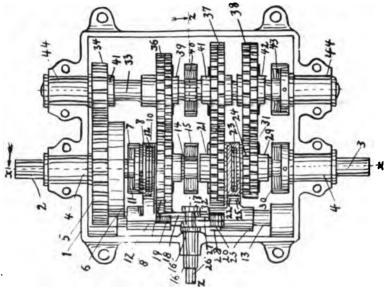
Harrison change gear, plan with cover removed, staggered gears. 3, Line shaft. 2, Tail shaft. 33, Side shaft. 13, Round shifter guide.
